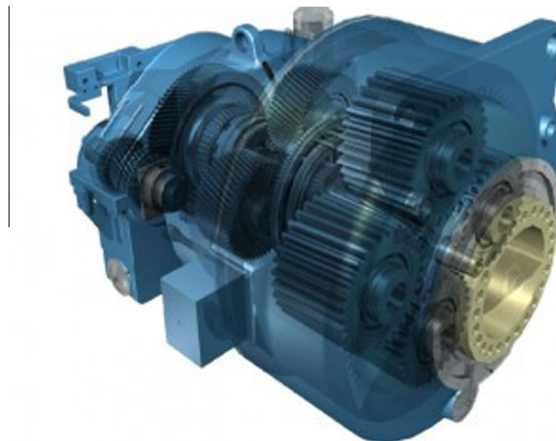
Wind turbine two-planetary-stage gearbox from GR drivetrains.
